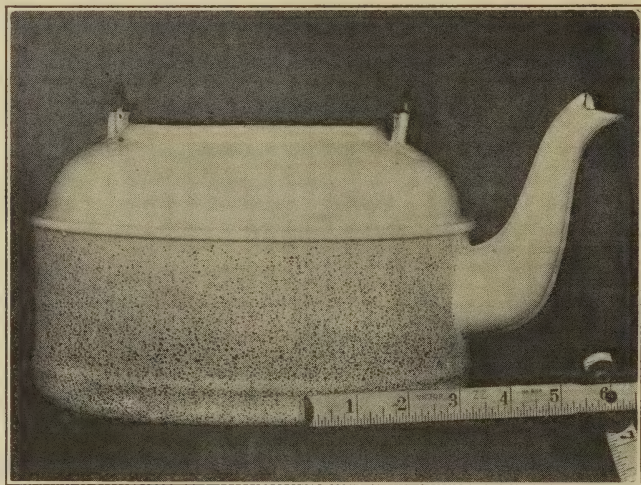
Tea-kettle Sample 8, showing extremely defective lower part, with good upper part and spout.
